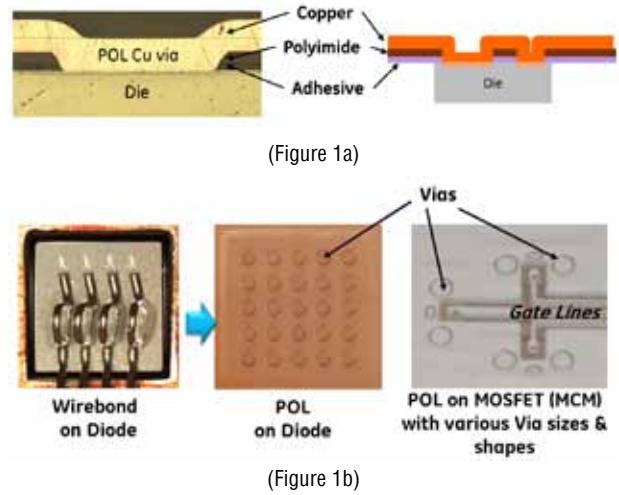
a) Basic one polyimide layer representation of POL interconnect; b) Wire bond and POL examples (top view)
